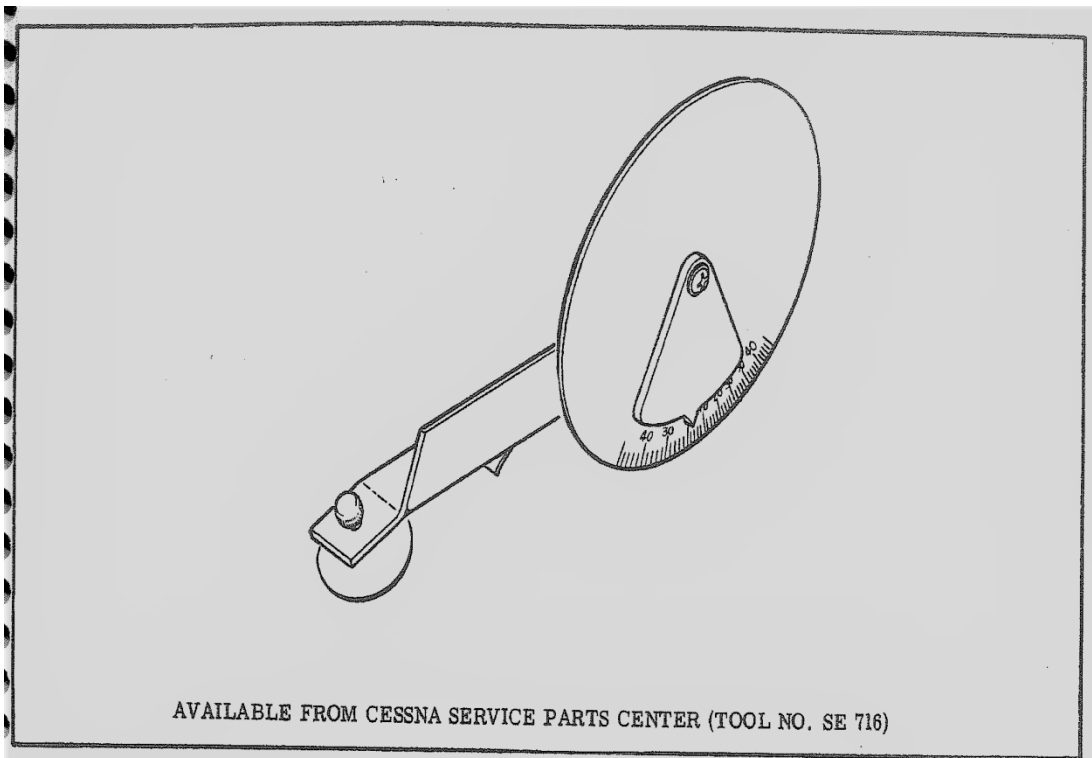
Inclinometer for Measuring Control Surface Travel
